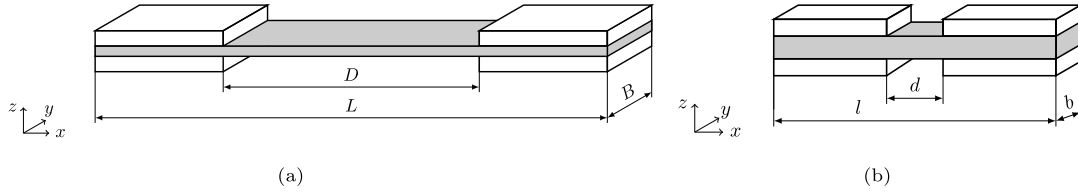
Dimensions of the coupons. (a) Monotonic and cyclic tensile test. (b) Uniaxial compressive test.
